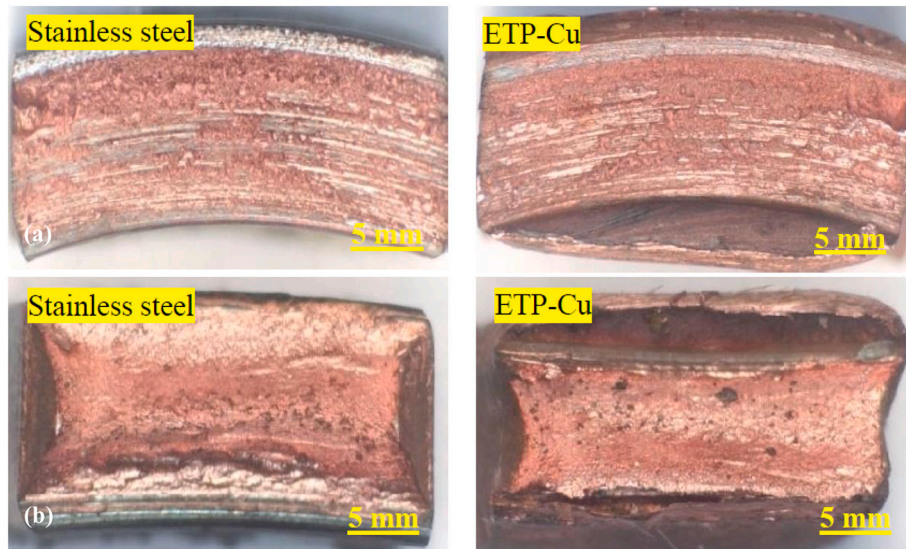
Macroscopic top view of fracture surfaces after tensile testing in case of (a) sample B, and (b) sample D.
